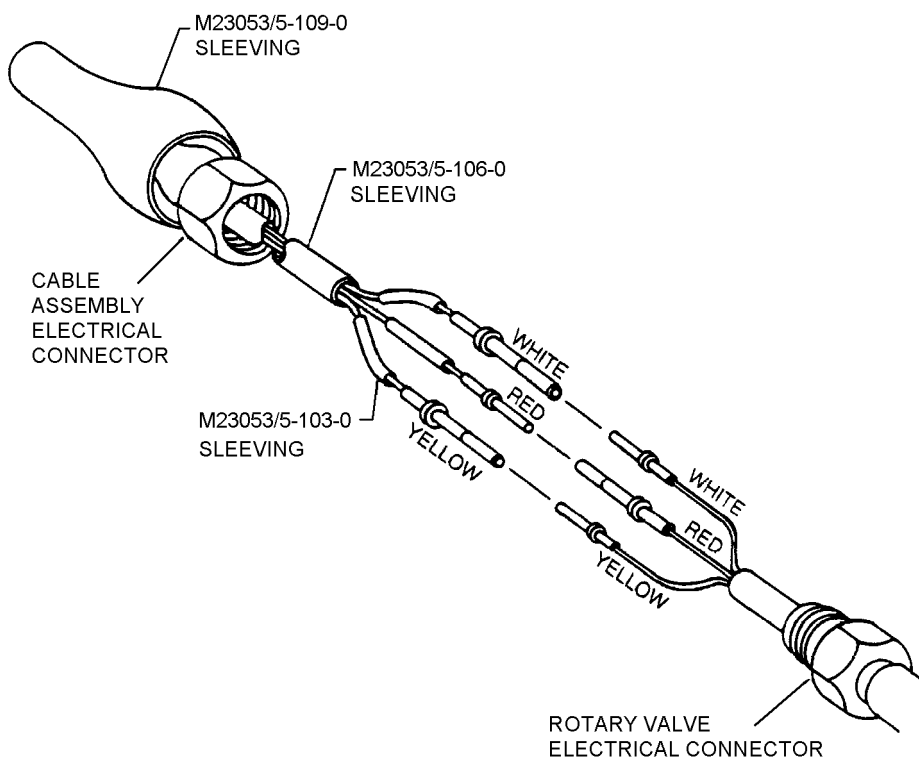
Wiring Connection for Cable Assembly Electrical Connector to Rotary Valve Electrical Connector
